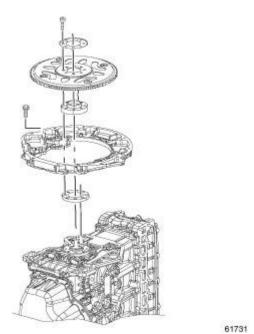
FLYWHEEL AND FLEX PLATE Courtesy of CHRYSLER LLC
